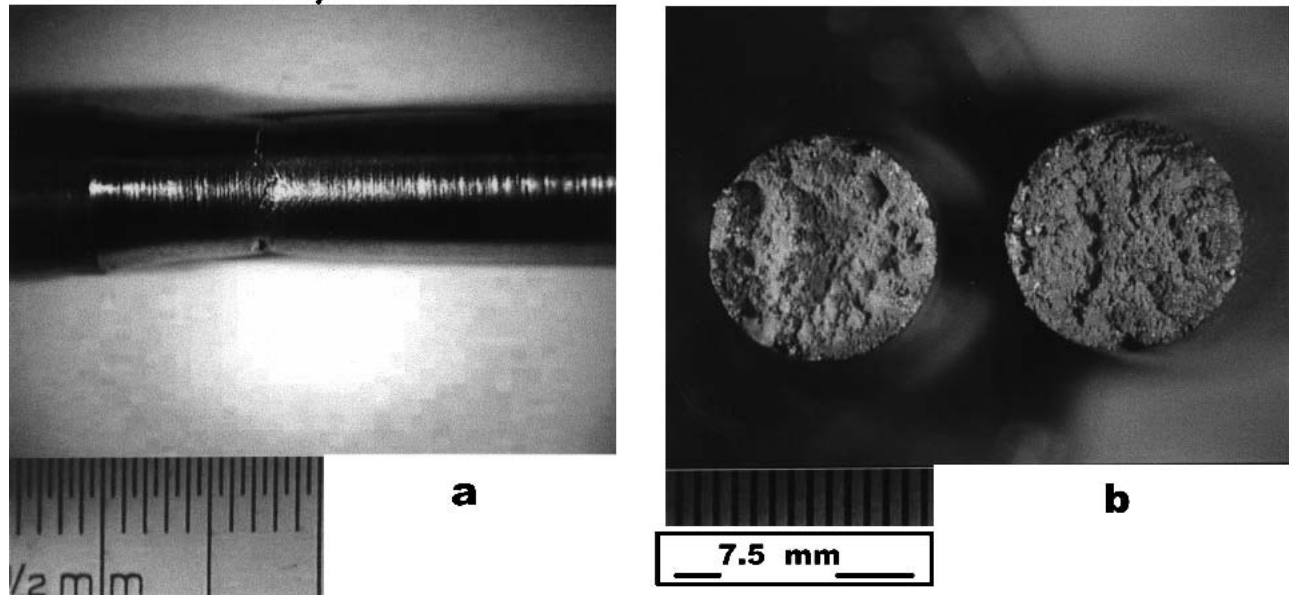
(a) Tensile fracture (after tensile test); (b) related fracture surfaces
